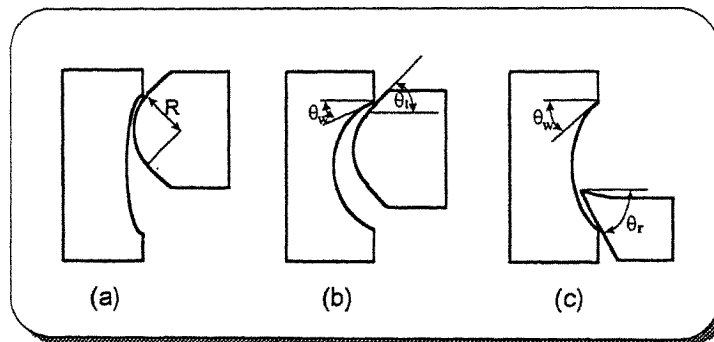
Inspectable interference between tool and workpiece.
